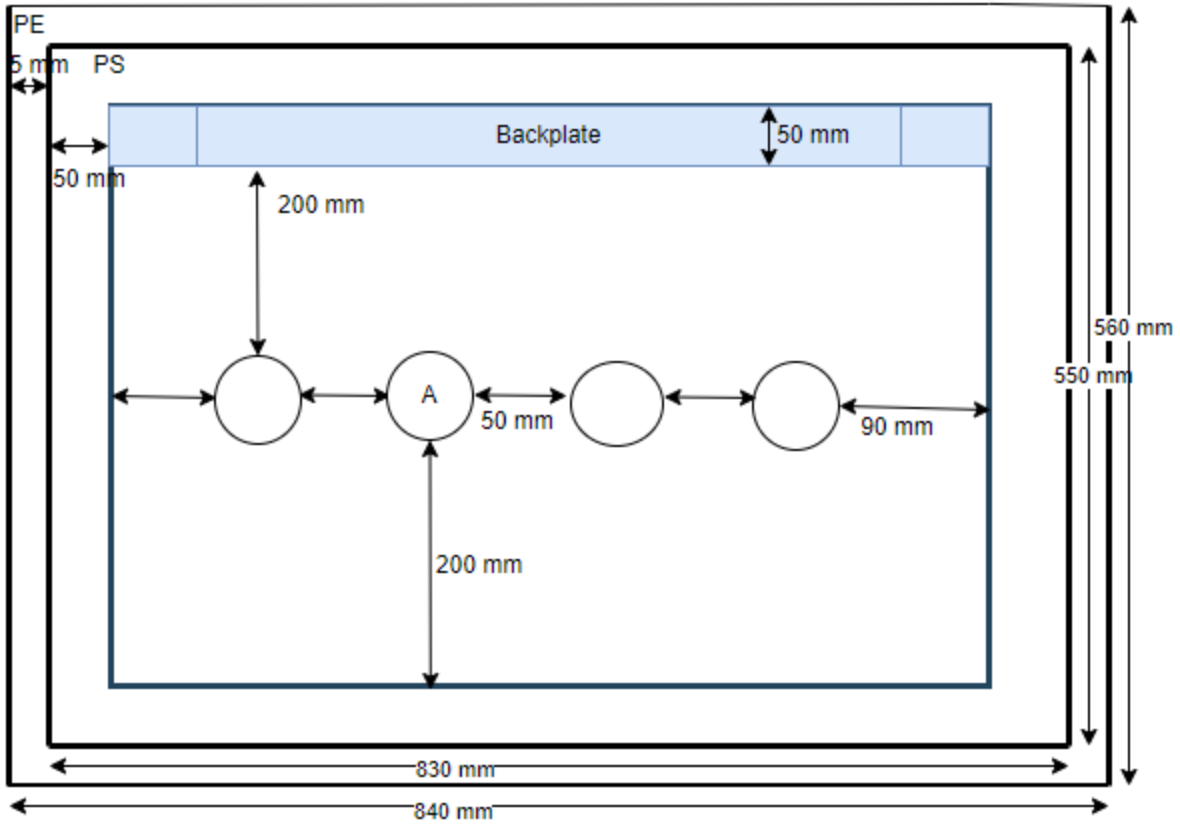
Top view of EC and its associated dimensions making use of key given in front view figure
